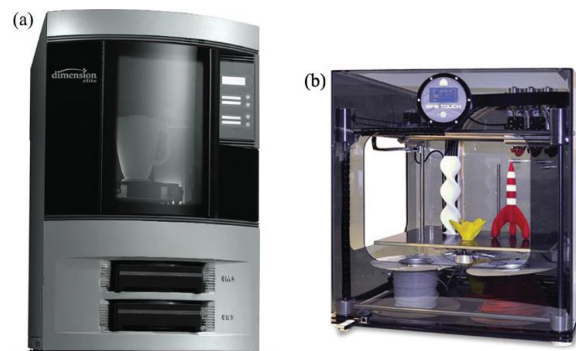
Other 3D printers included in the benchmarking analysis: (a) Dimension Elite; (b) 3D Touch.
